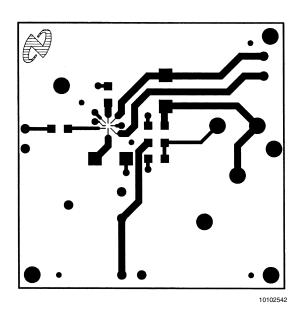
Recommended micro SMD PC board layout: component side layout
